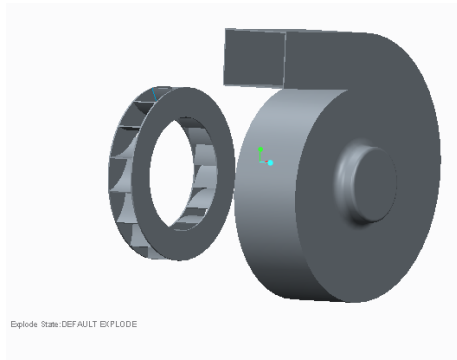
Exploded view of assembly of impeller and hub
